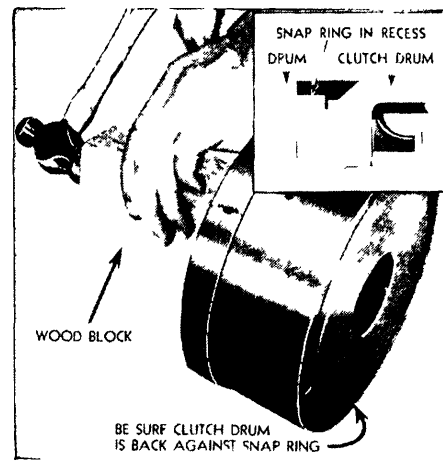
After installing clutch drum snap ring, tap clutch drum rear thrust face until drum seats against snap ring
